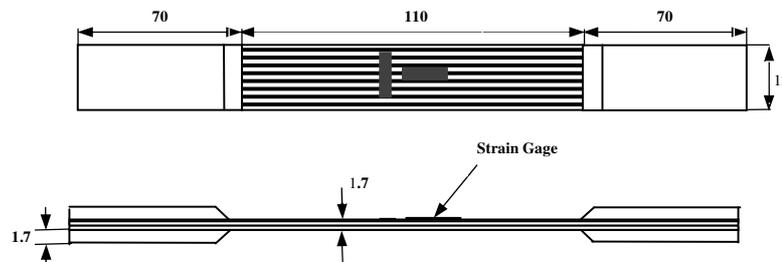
The dimensions and geometry of longitudinal tensile test specimen
